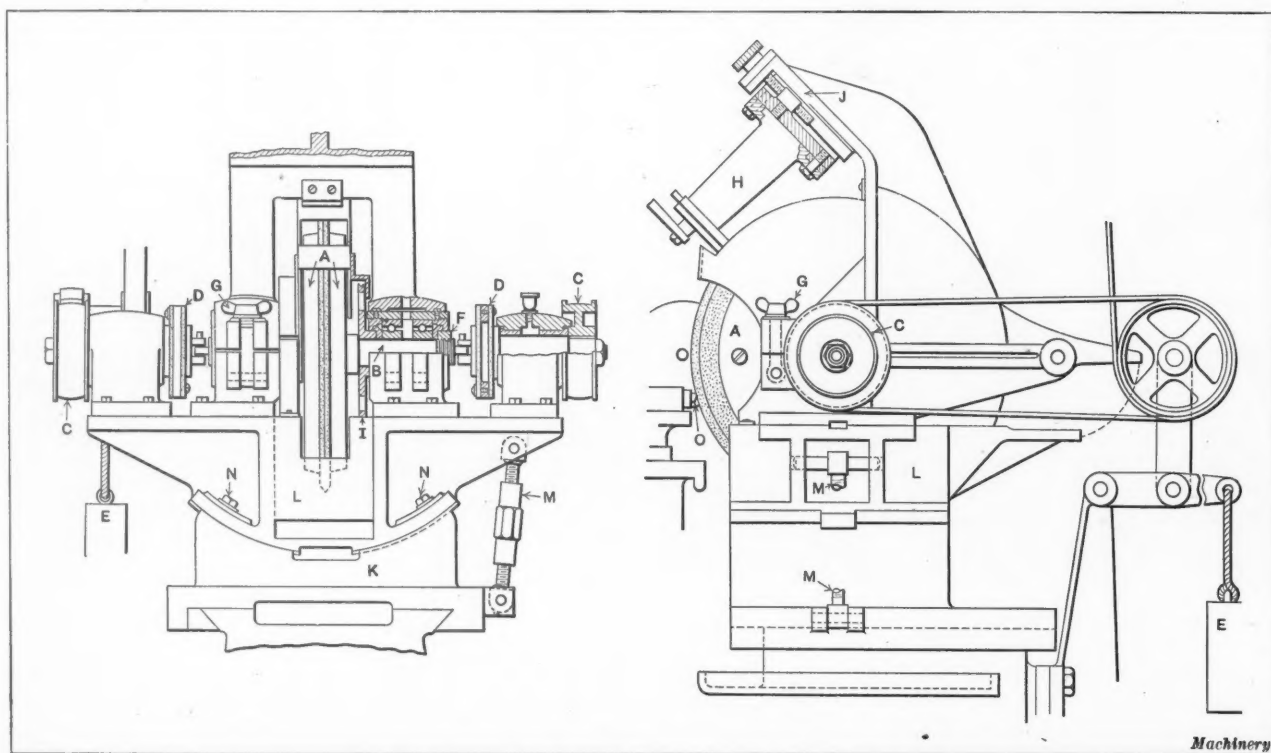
Details of Mechanism on the Harris Thread Grinding Machine
